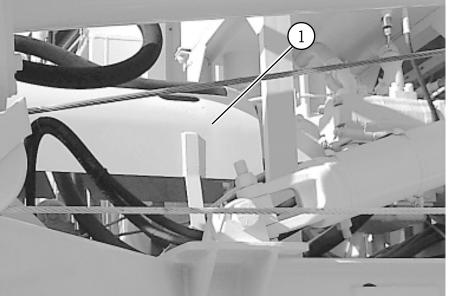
Driveline Assembly 1. Driveline Guard
